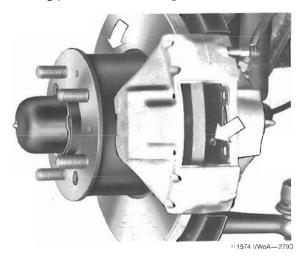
Retaining plate that determines piston position. The two pressed-out projections (lower arrow) must engage the cutout in the piston so that the plate will lie flush with the piston face. Upper arrow indicates direction of forward wheel rotation.
